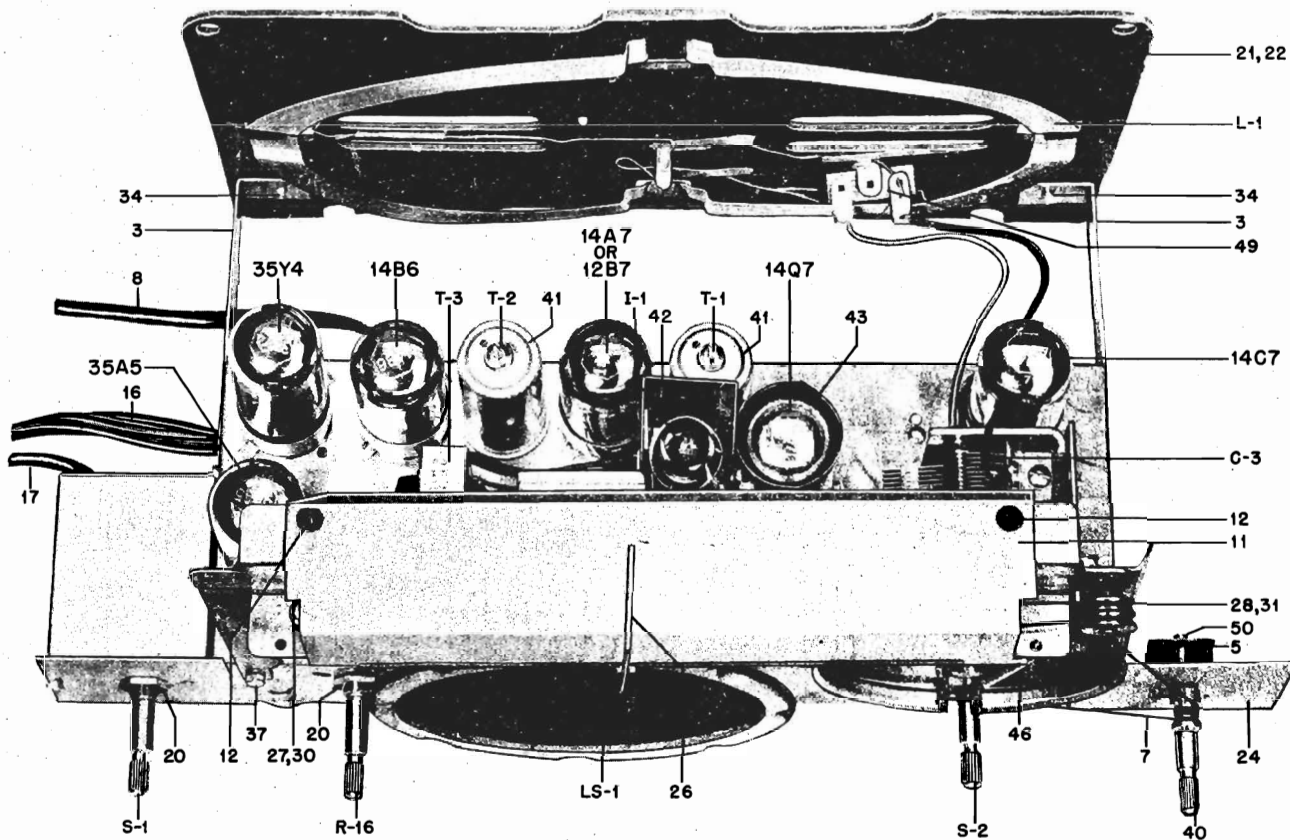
CHASSIS HS-122 PARTS LOCATIONS - TOP VIEW
